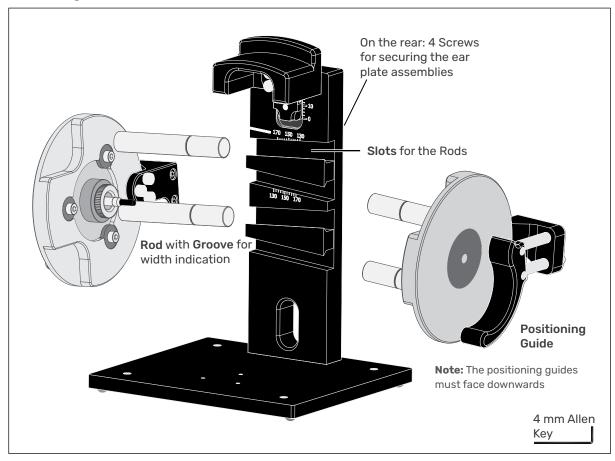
Mounting the ear plate assemblies in the text fixture.
